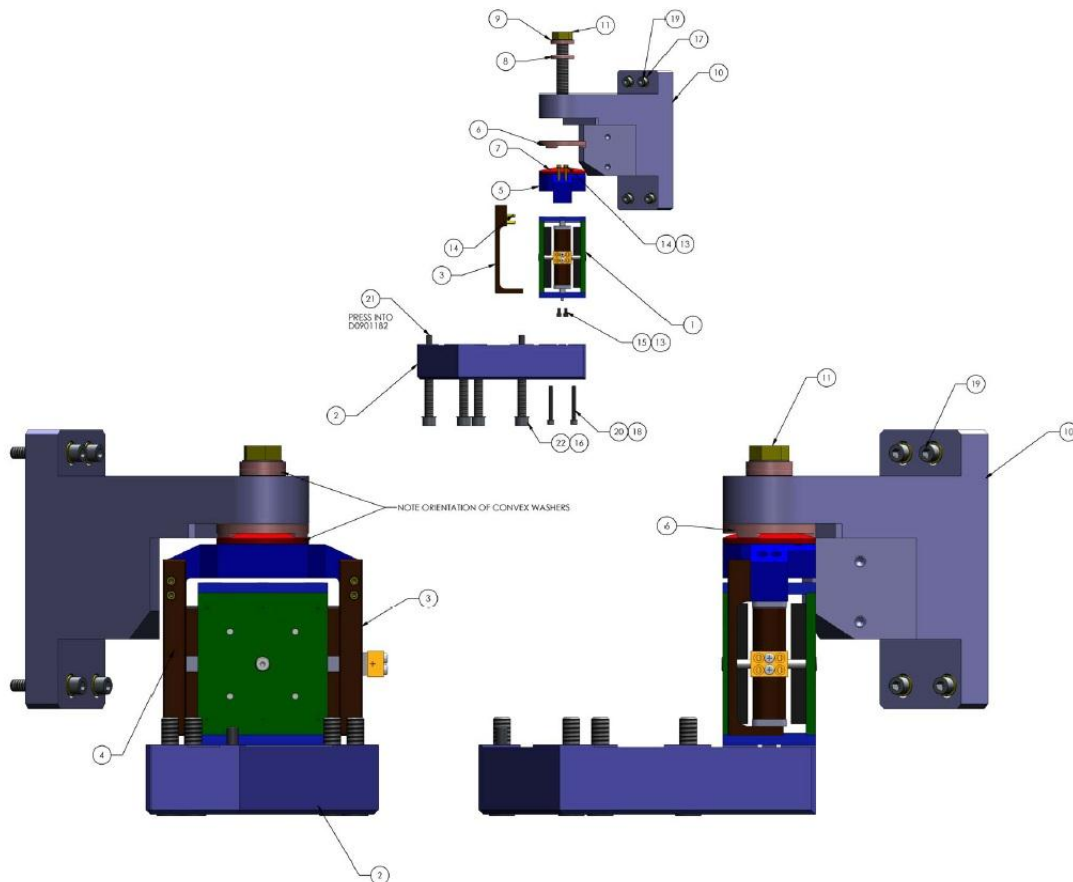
D0902531 Stage 1-2 Vertical Actuators Assembly Drawing
